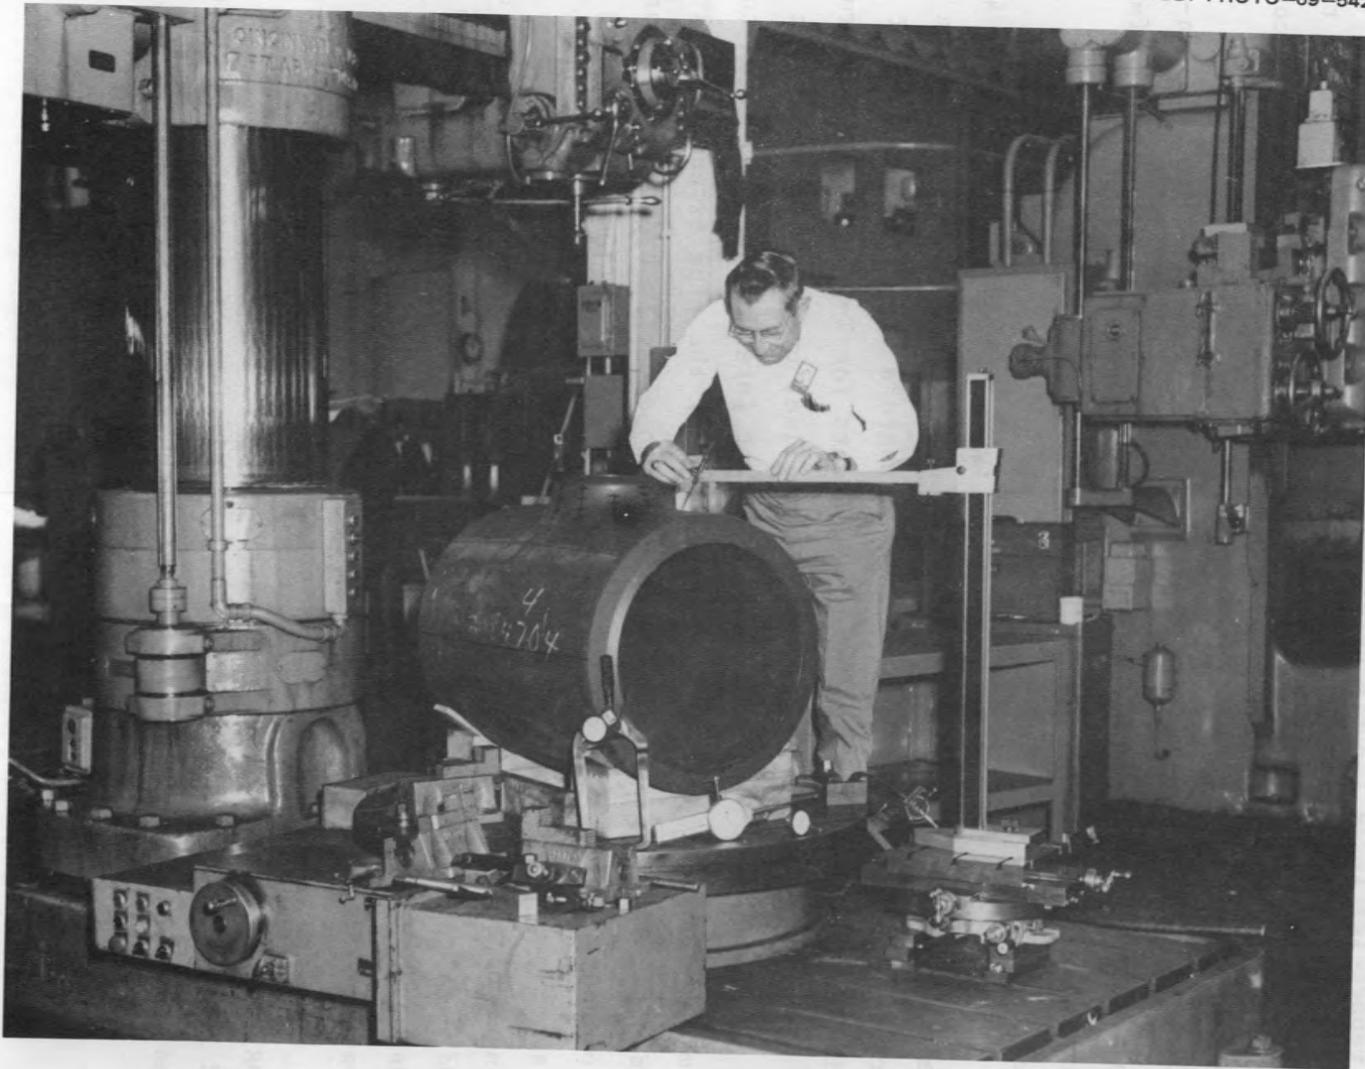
Dimensional inspection of 24 x 10-in. NPS sched. 160
